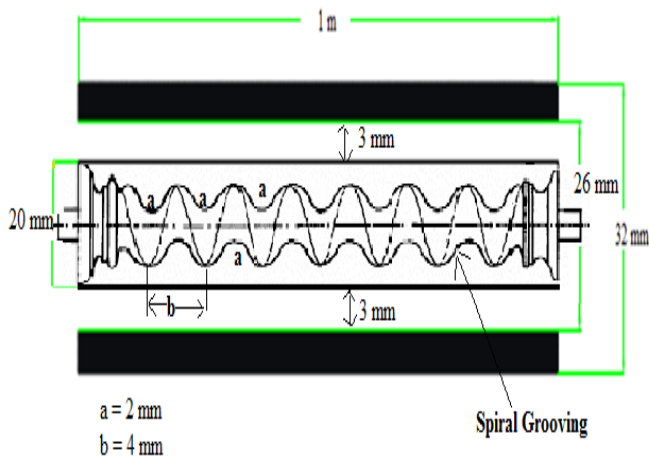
Layout of concentric tube heat exchanger with internal spiral grooving.
